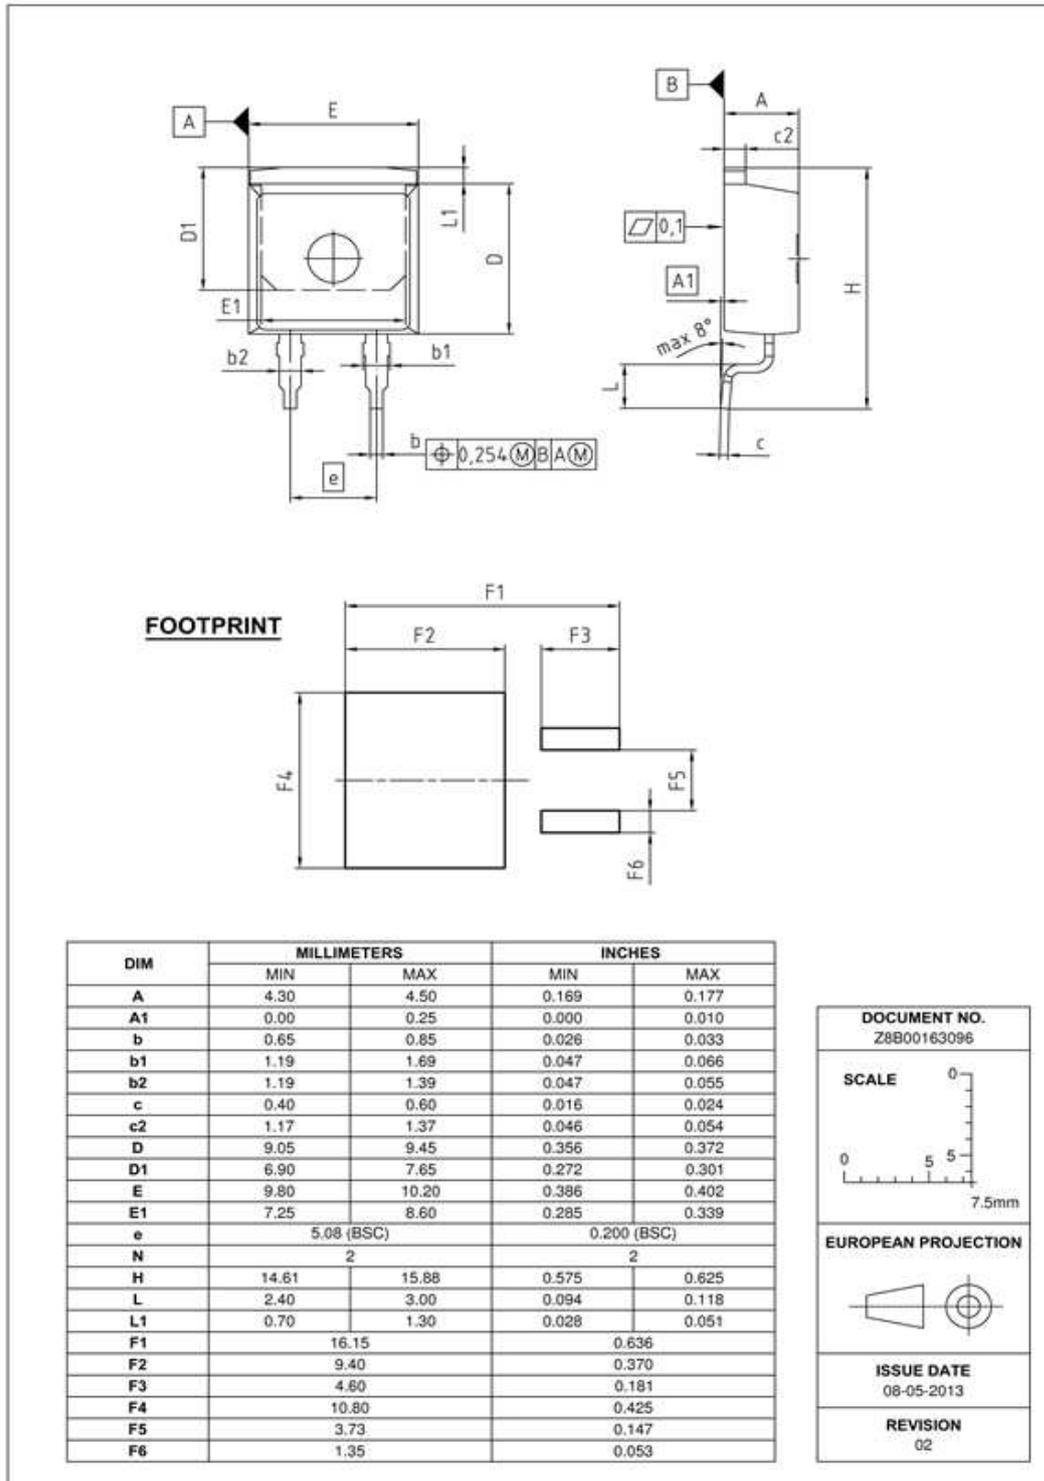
Outlines TO-263-2, dimensions in mm/inches
